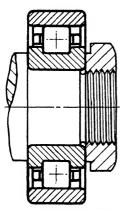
HOFFMAN SIMPLE RADIAL ROLLER BEARING
